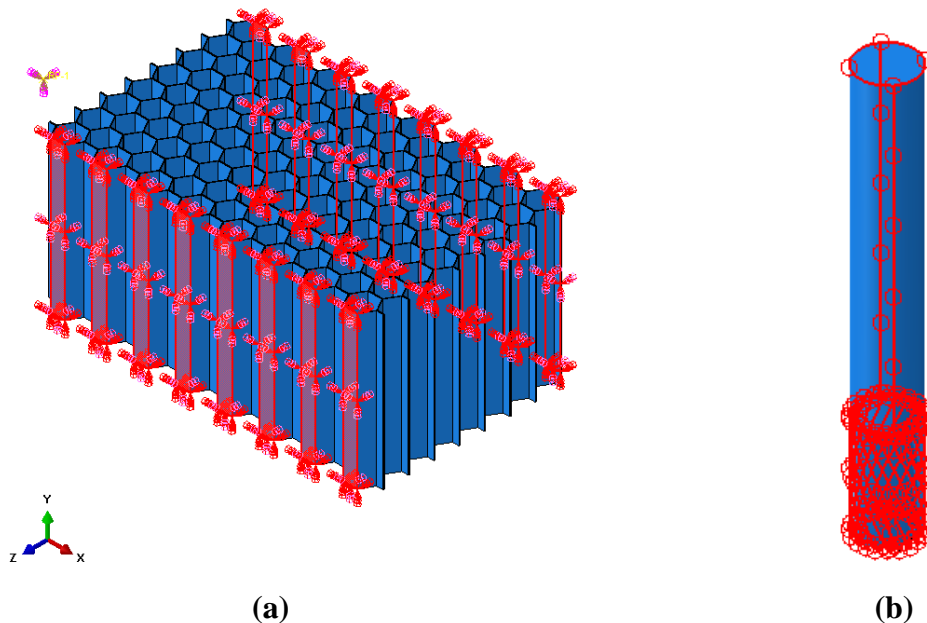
(a) Encastre Constraint for workpiece (b) Rigid Body for tool
